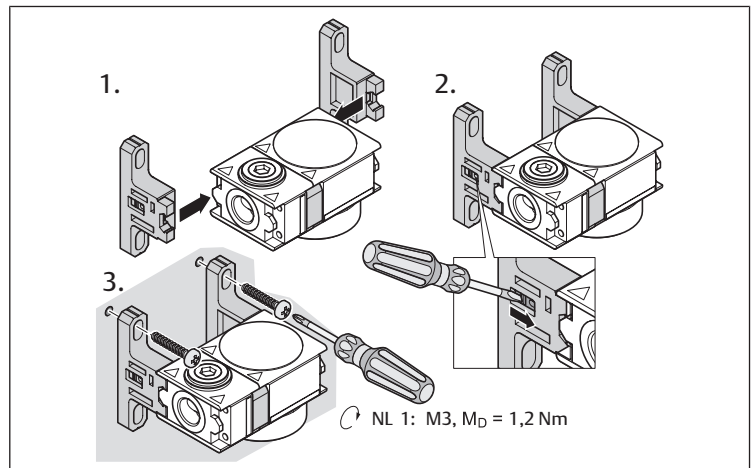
Block assembly and mounting with block assembly kit W05 | Series NL1
